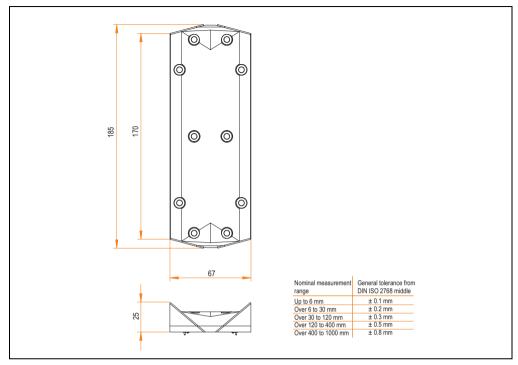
Dimensions - extension connector 5AC800.CON1-00
